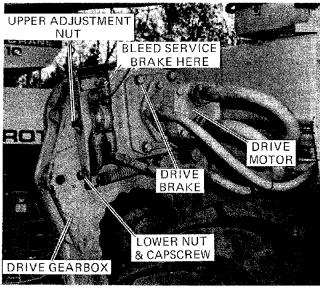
Drive Brake Adjustment "Bleed Service Brake Here"
